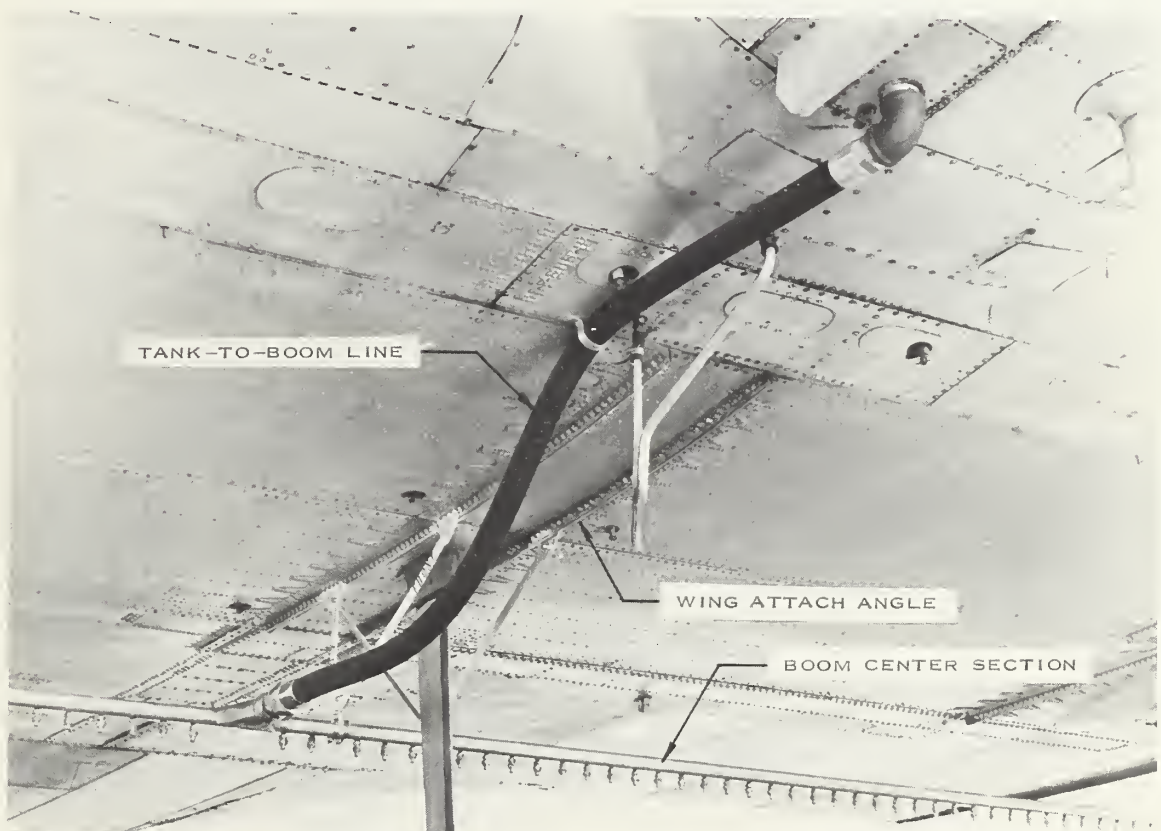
Aft view showing center boom section bolted to existing fuel tank cover attach angles.
